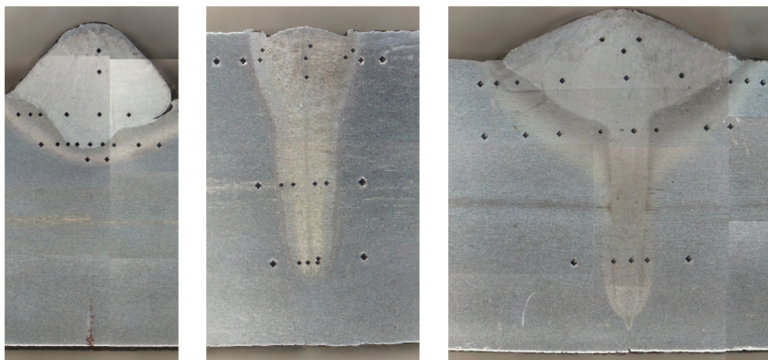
Weld cross-section; a) GMAW, b) LBW, c) HLAW
